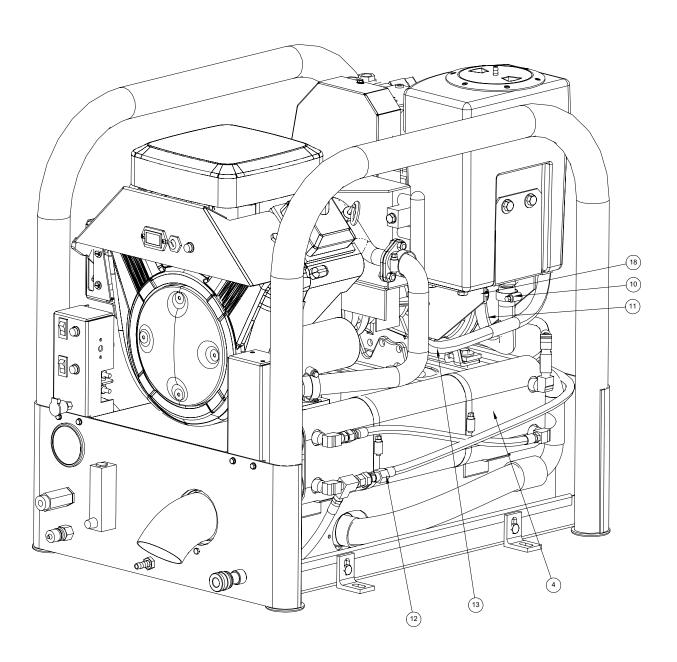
Machine Assembly - Rear Left View D-2793 Rev L
